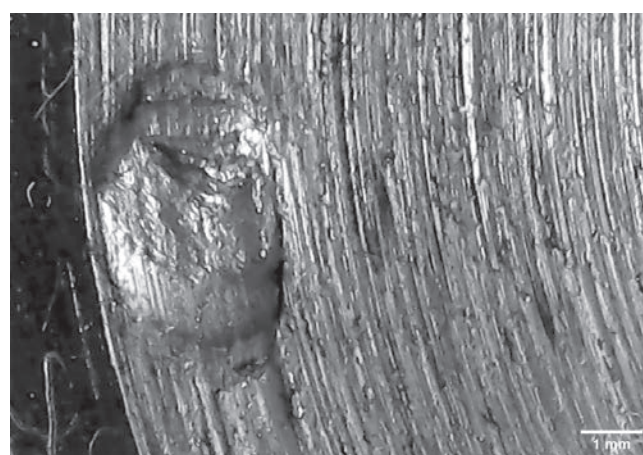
Enlarged view of material sticking to the surface of the injection pump part
